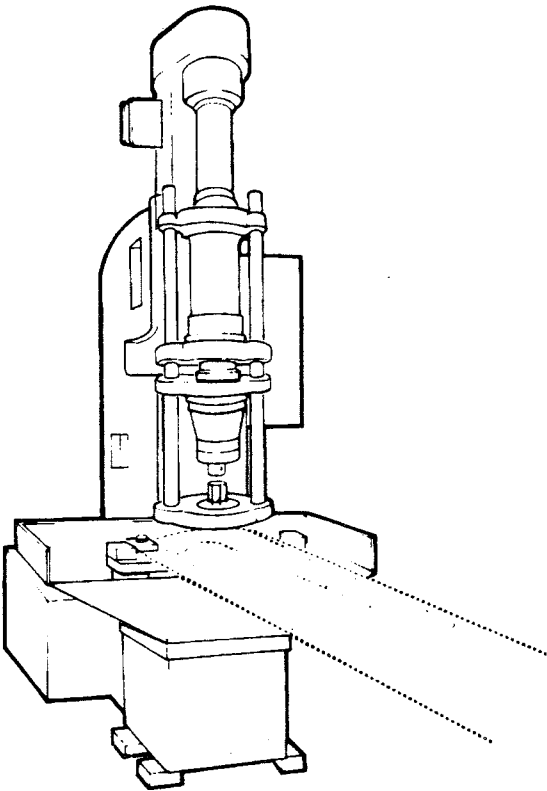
Special Tools and Equipment (Sheet 3 of 6)
